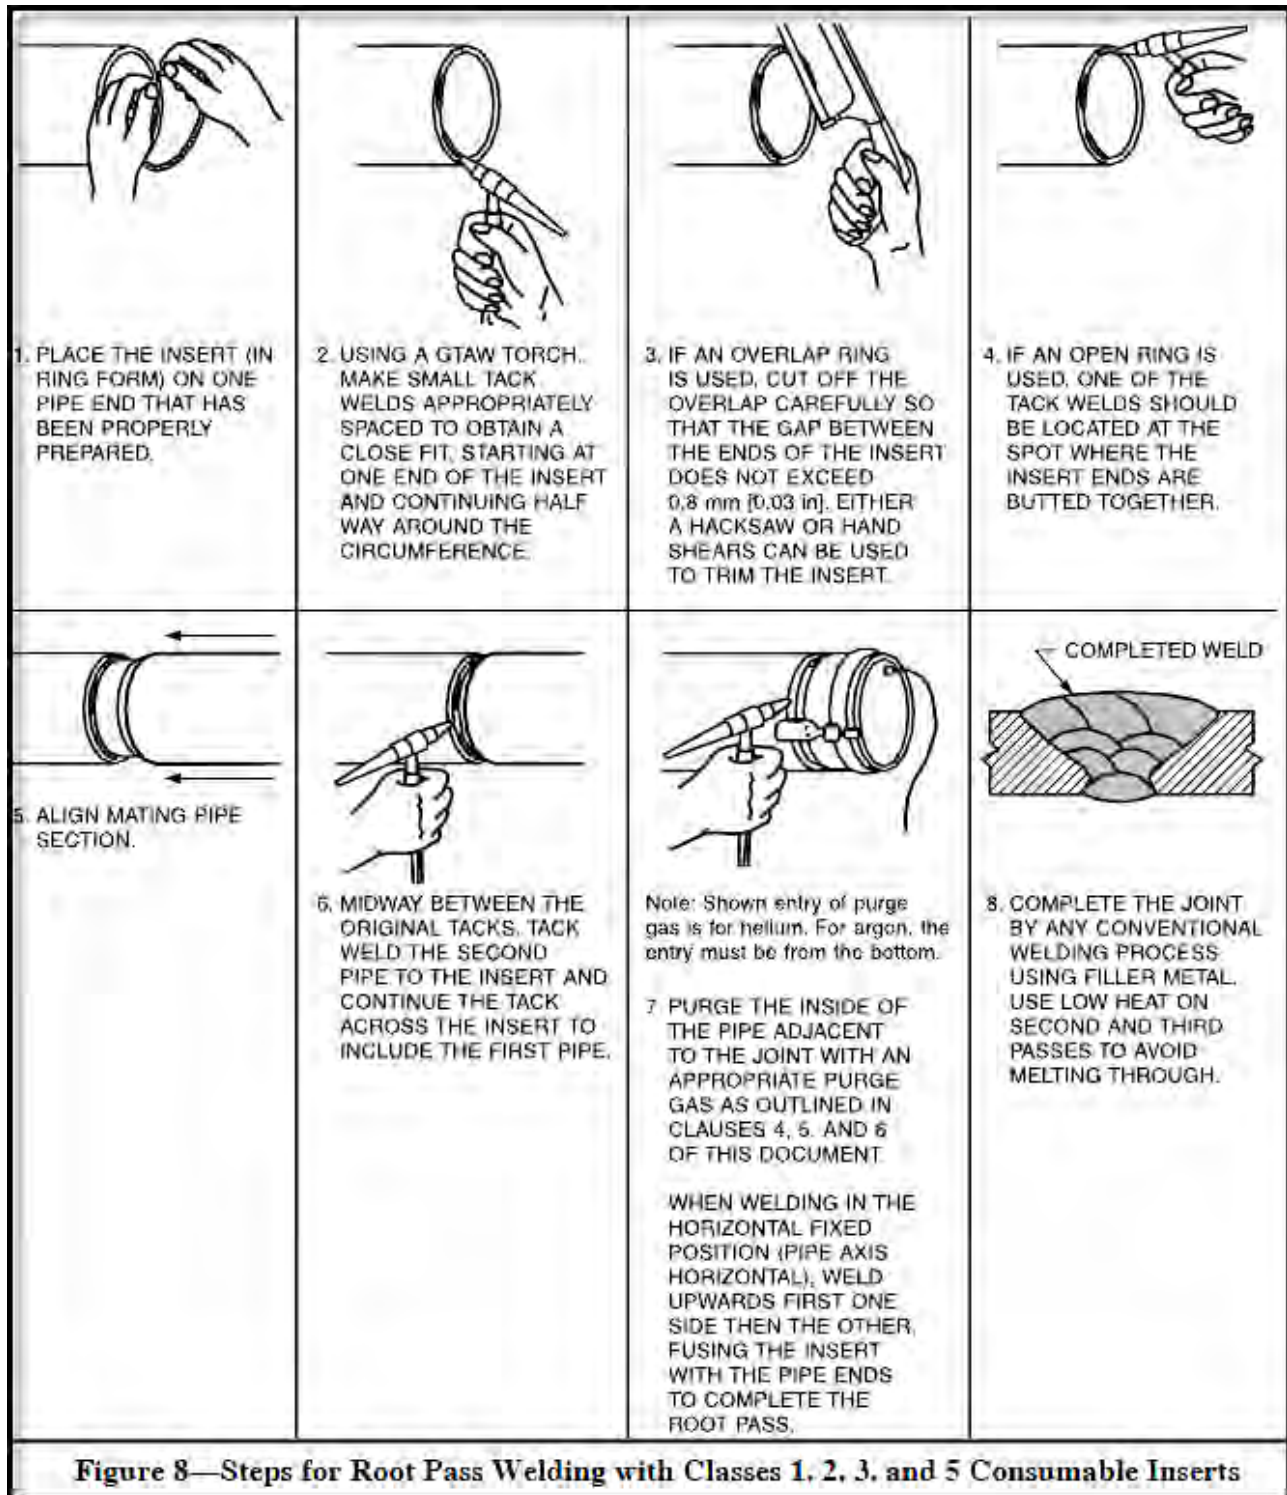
Steps for Root Pass Welding with Classes 1, 2, 3, and 5 Consumable Inserts
